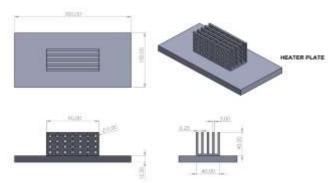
Design of Heater Plate and rectangular fin with circular perforation.
